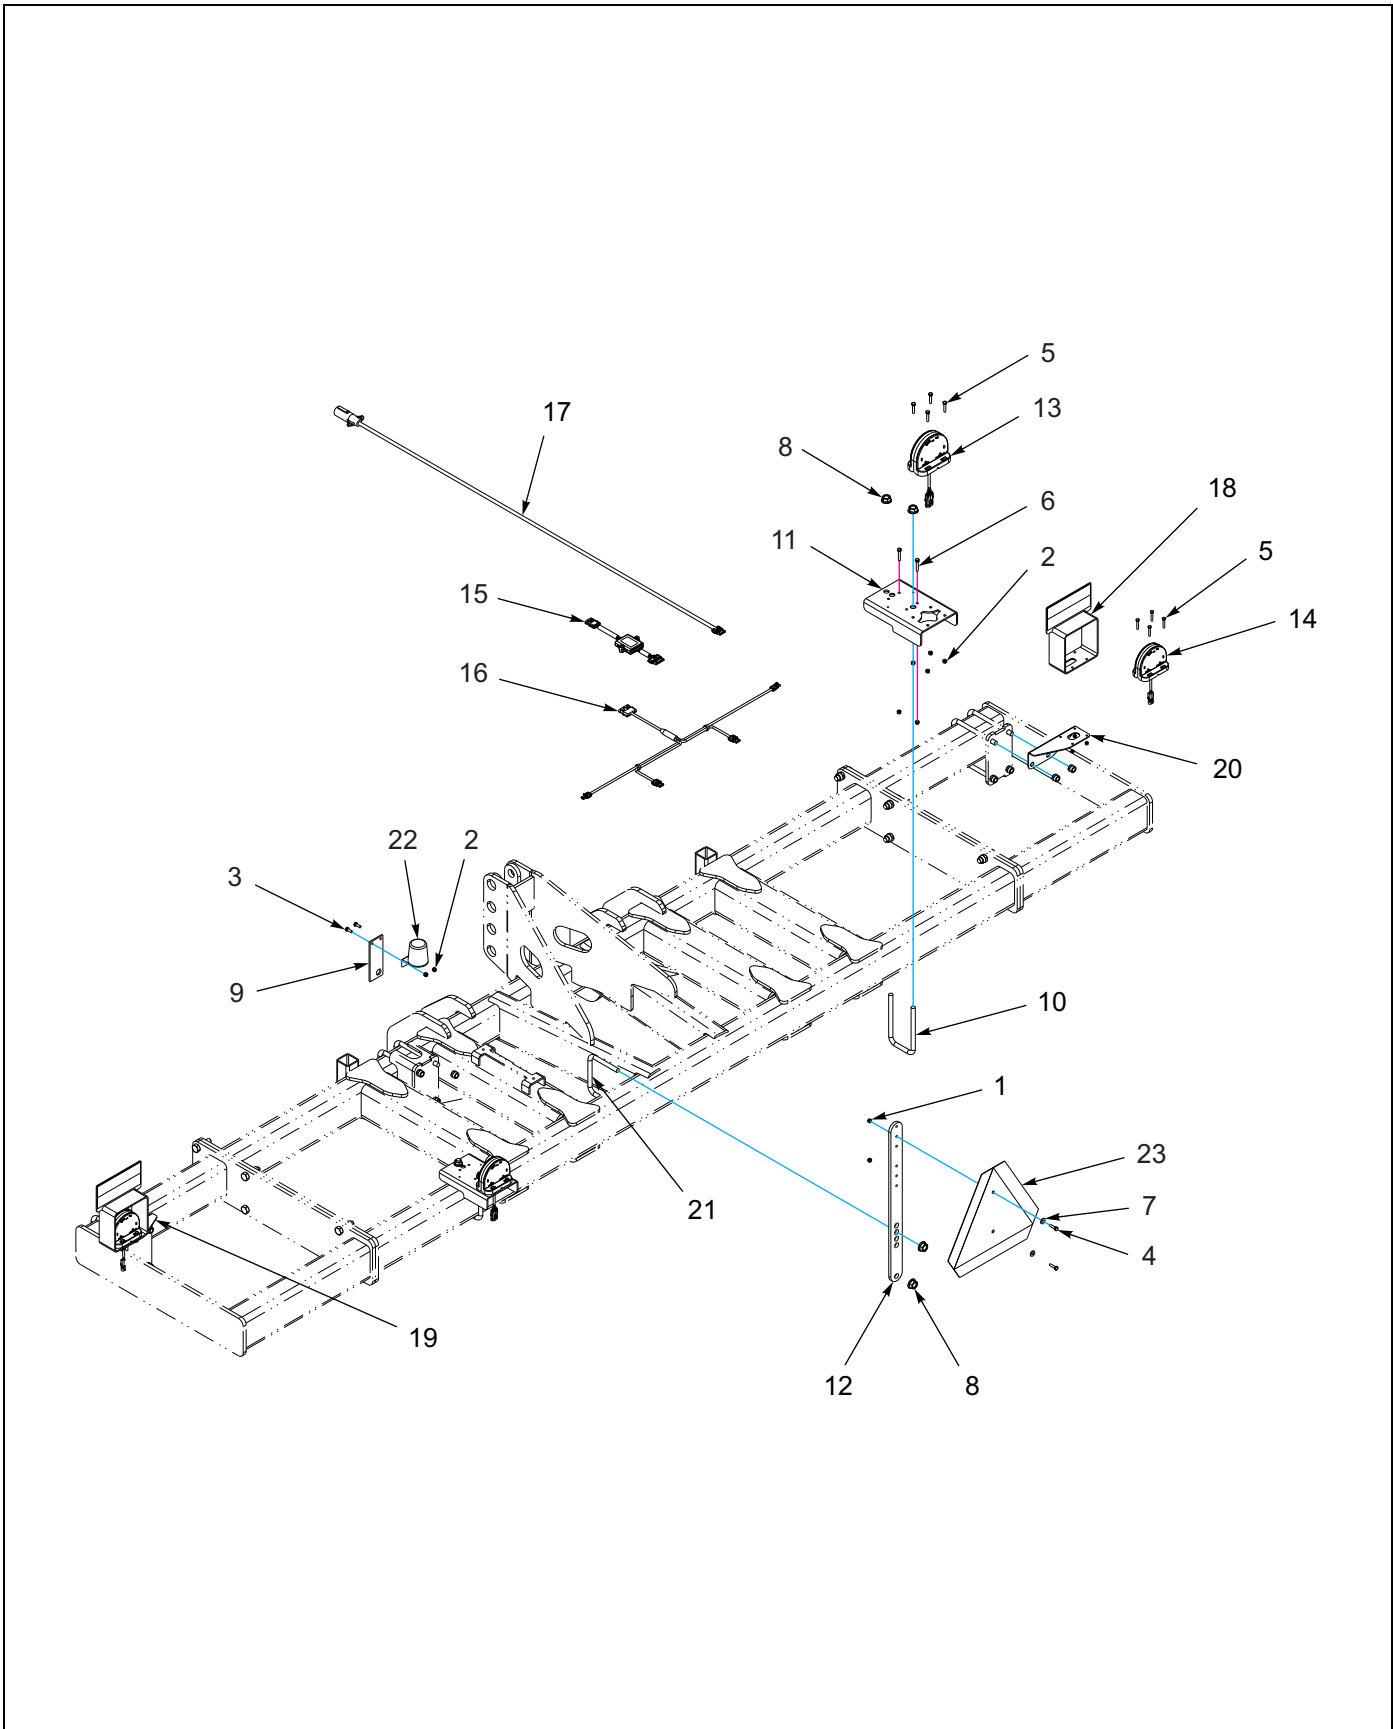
Electrical Assembly - Standard 6 & 7 Shank
